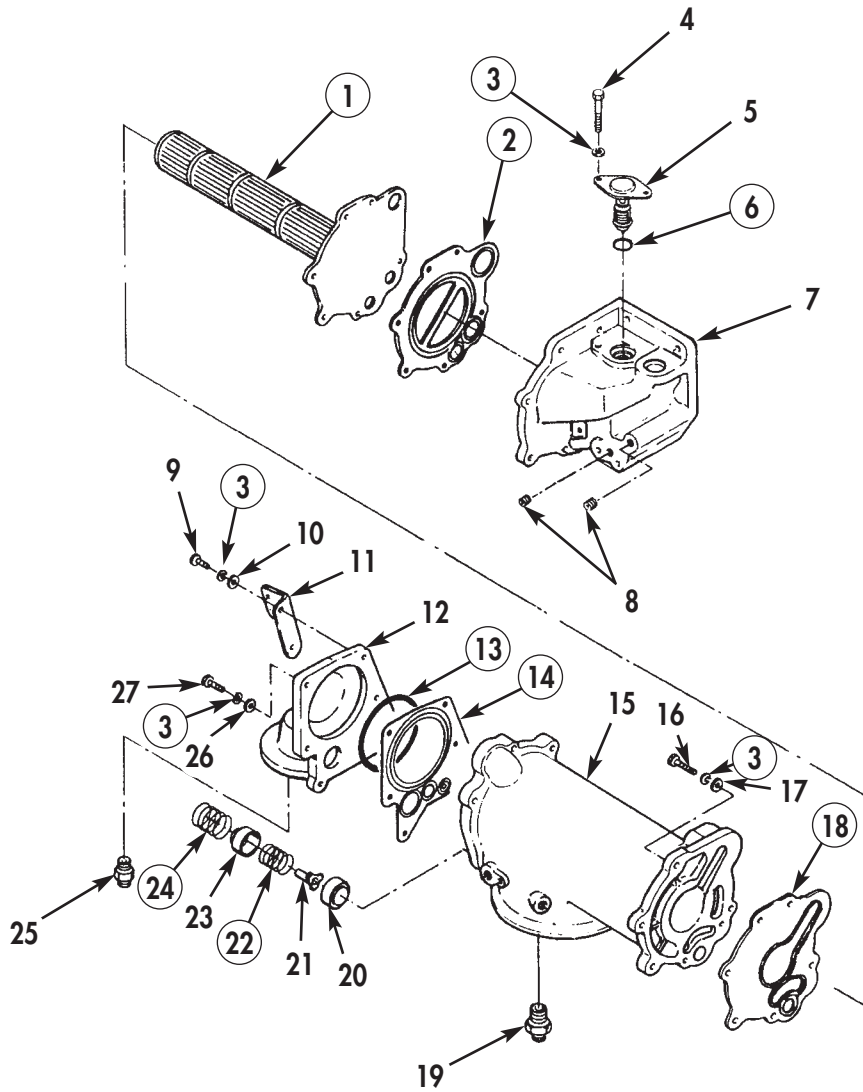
Oil Cooler Disassembly—Big Cam III Engine.
